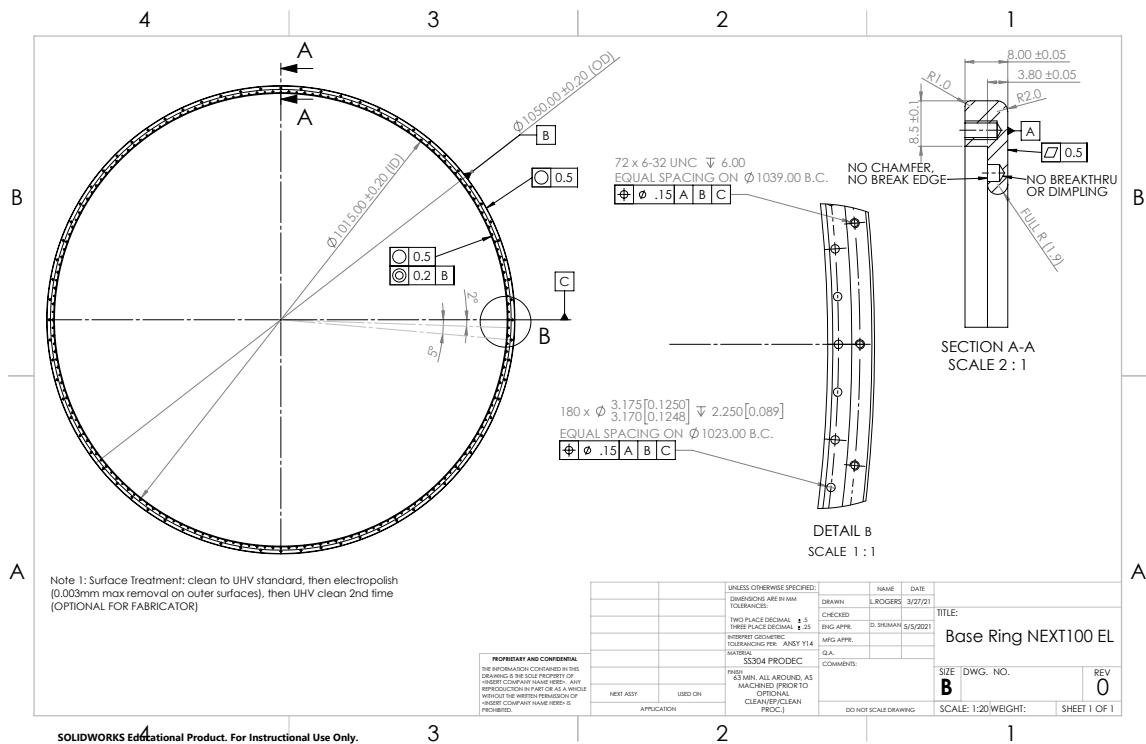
Machine drawing for manufacturing the EL Base rings.
